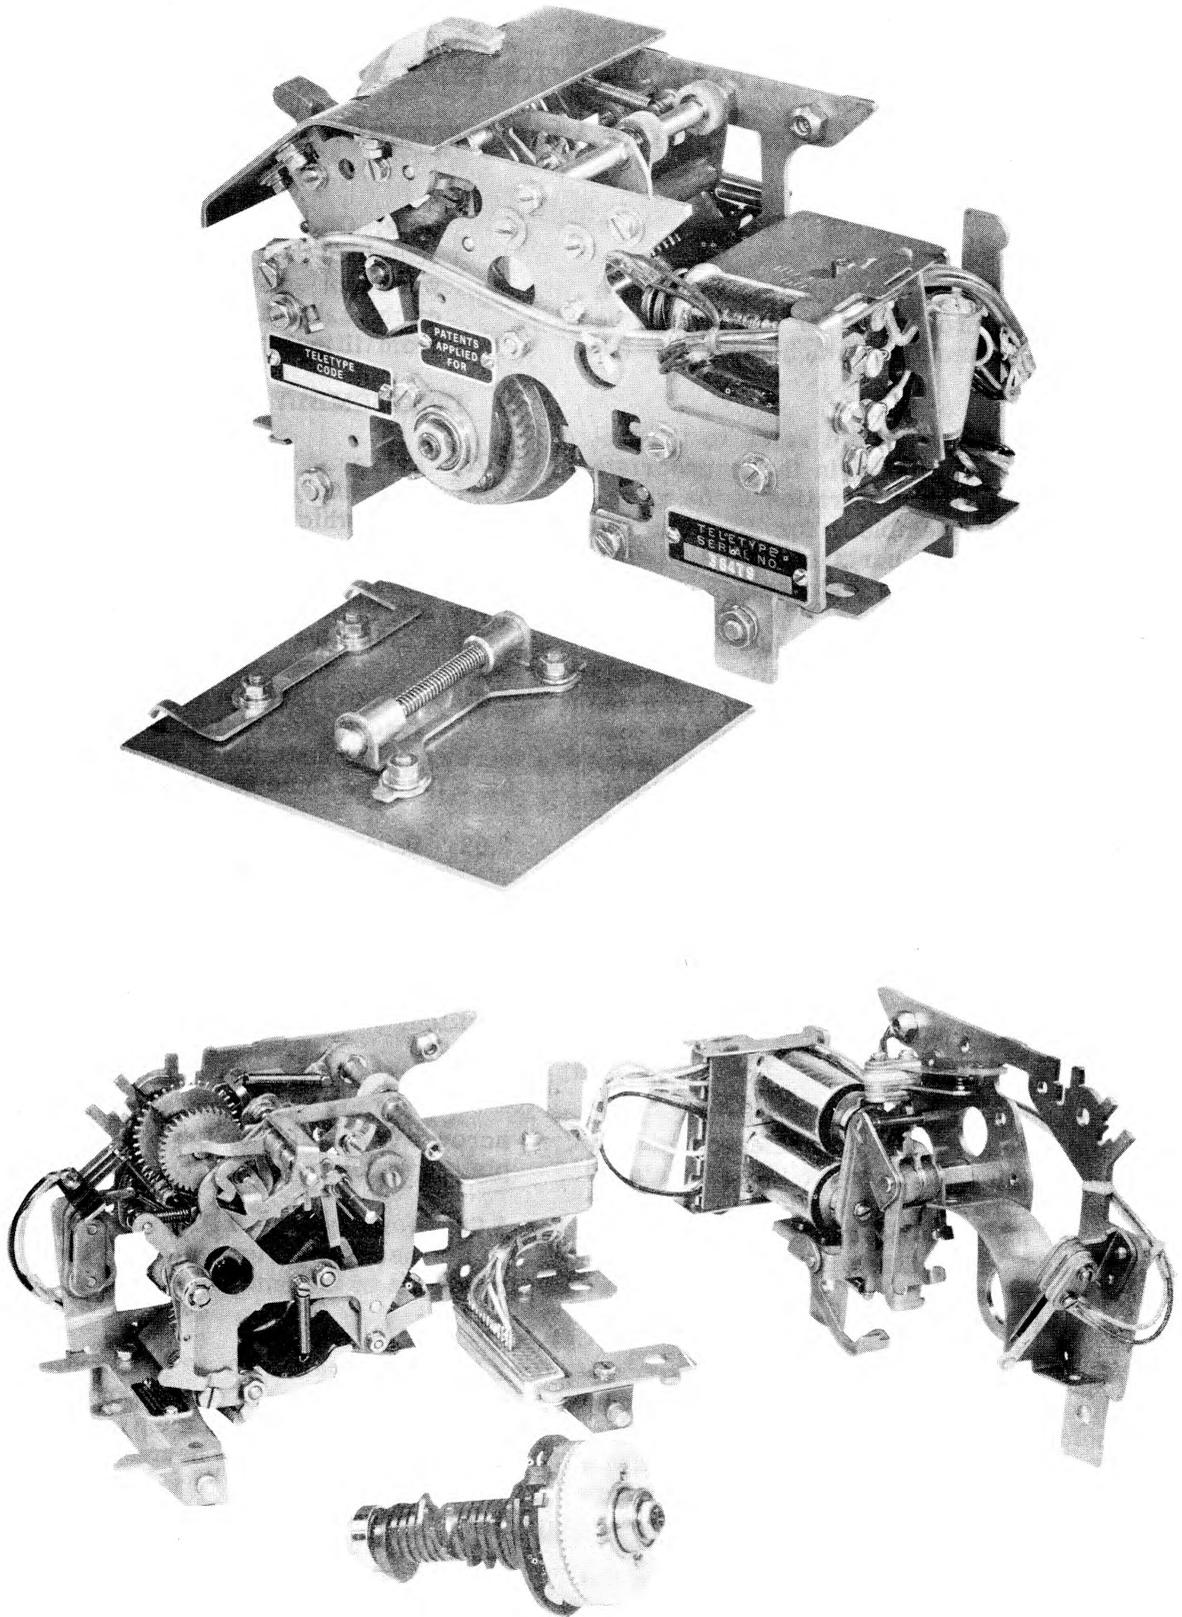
35 Transmitter Distributor-Cover Plate Removed (Upper)
